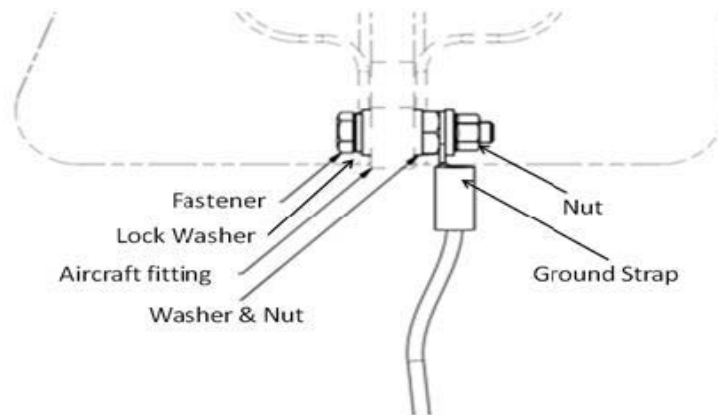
Typical Ground Strap Arrangement for A791 Compliant Fittings
